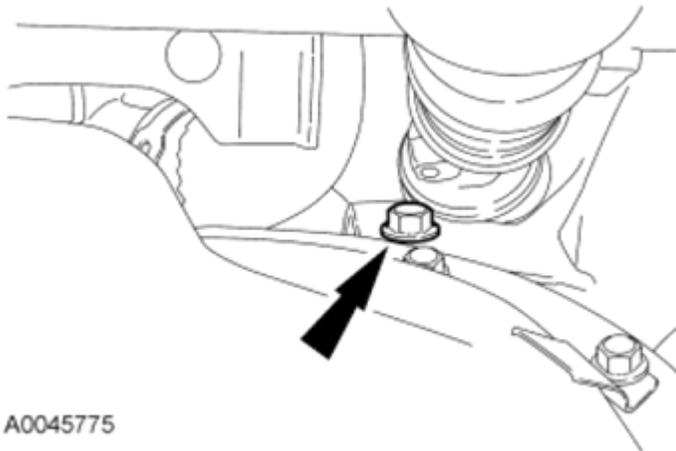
Locating Upper Front Axle Carrier Mounting Bushing Bolt
